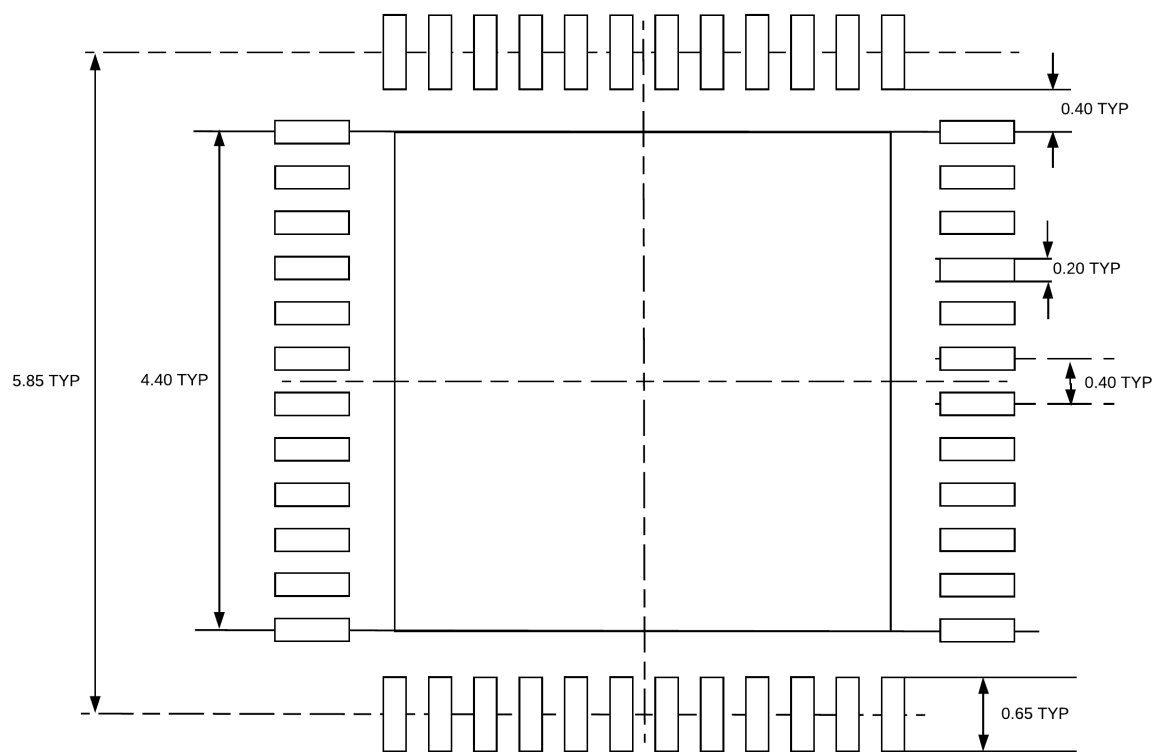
48QFN Package Outline Drawing (0.4mm pitch)
